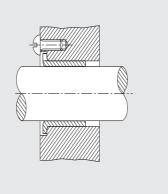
Cylindrical shaft. Axial retention by means of a screw. The recess in the housing must be deeper than dimension s_1 as per Table 4.
